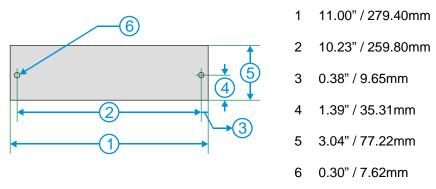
UPS Battery Pack Remote Mounting Dimensions
